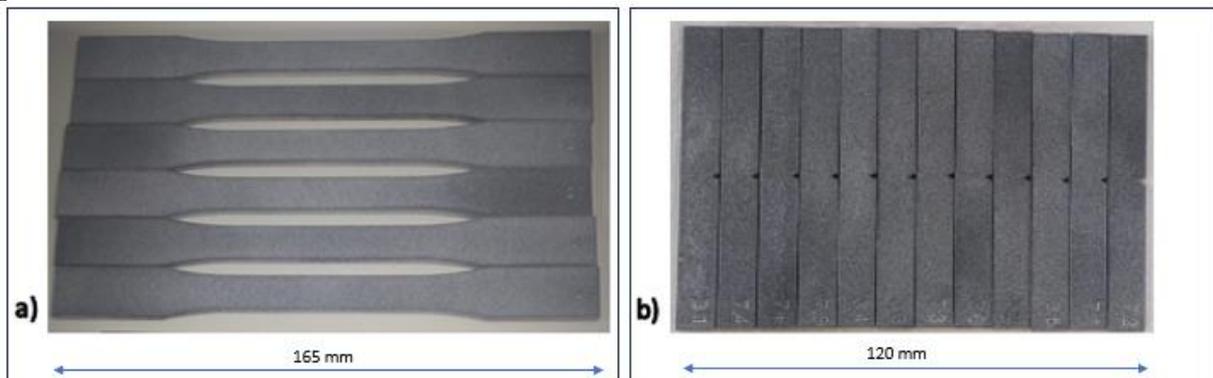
Specimens printed samples in PA12 for this work: a) tensile tests and b) Izod impact tests.
